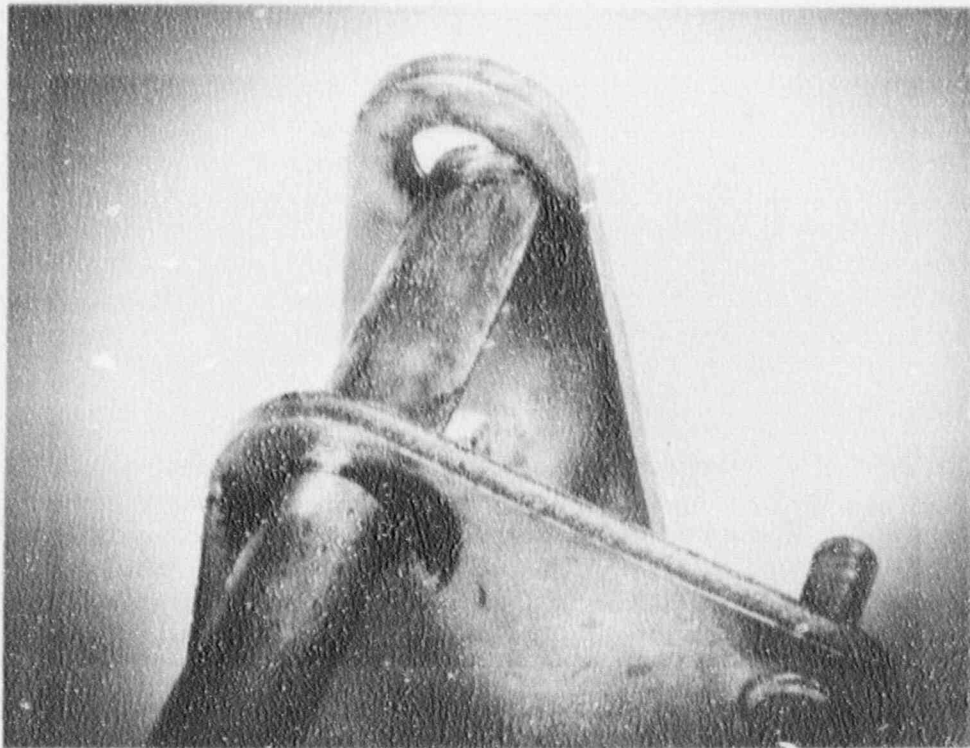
Demonstration of the Pole Lever Misalignment Caused by Cracks in Welds #1 and #3.
